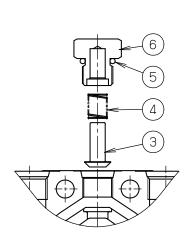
Check valve (dozer, boom swing, swing, arm, boom, bucket)
